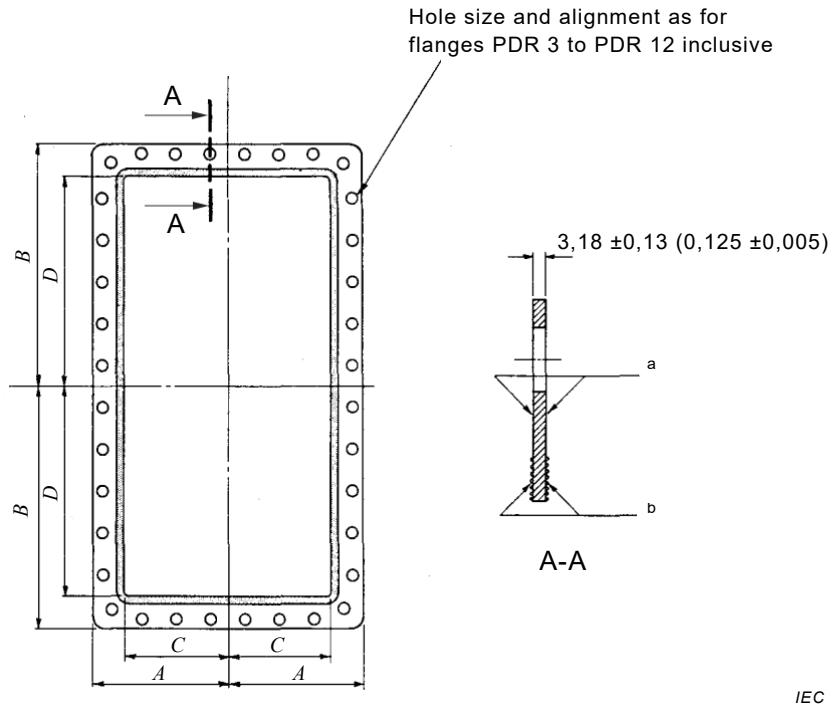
Flange type C: 60154 IEC-PCR 220-500
